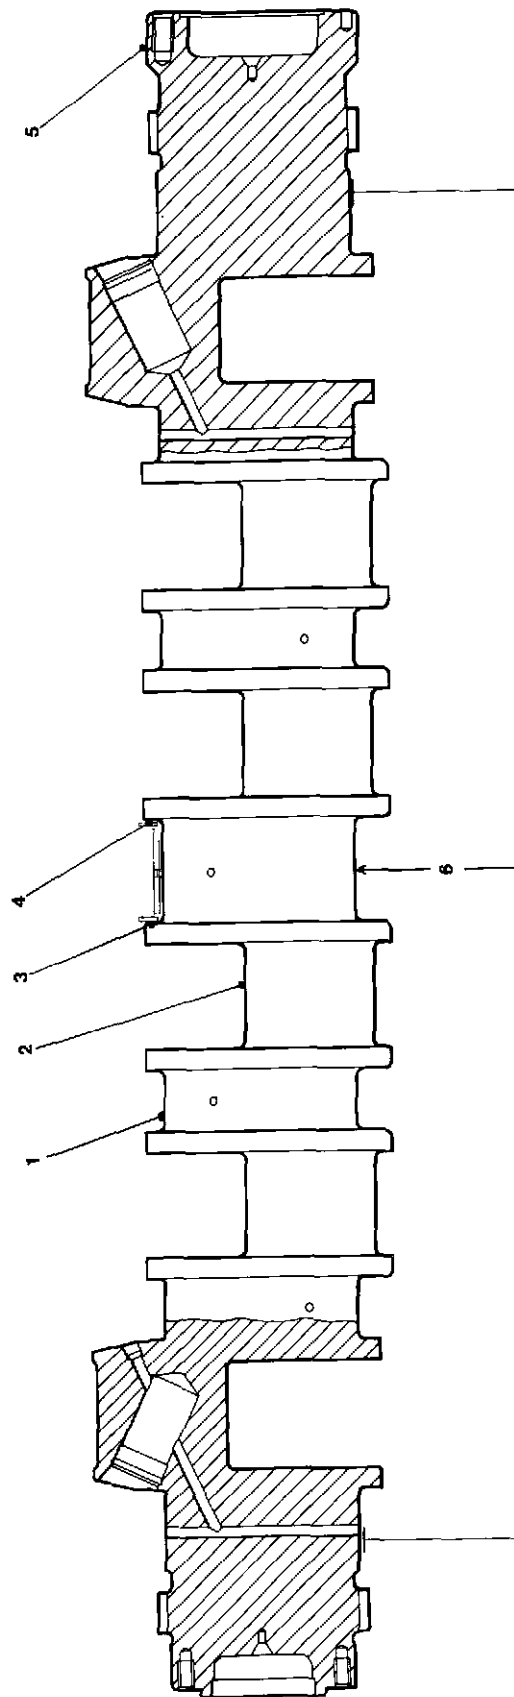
Fits and clearances, crankshaft, main bearings and flywheel
